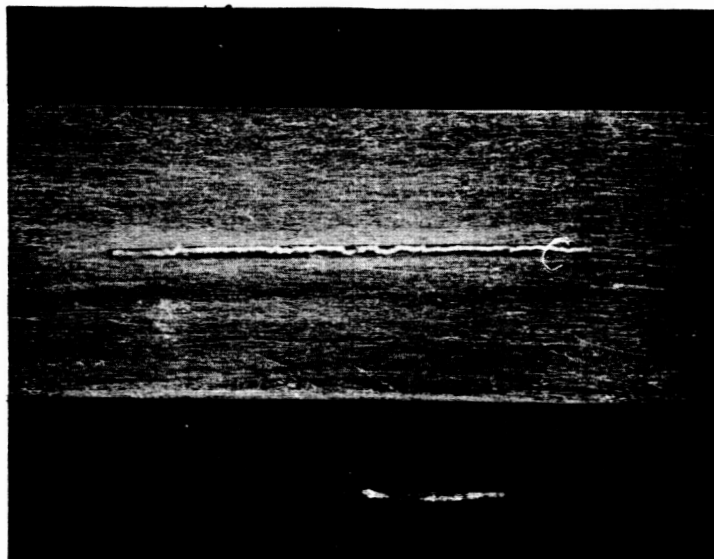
Seam weld on surface of 2014 Aluminum. Weld schedule: 1.99 volts, 20 lbs. pressure, 30 inches/minute speed. 1.4X
